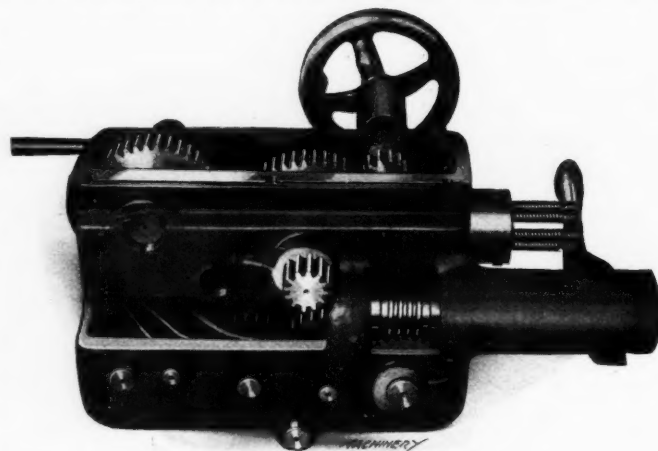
Rear View of Apron, showing Mechanism for making Feed Changes
